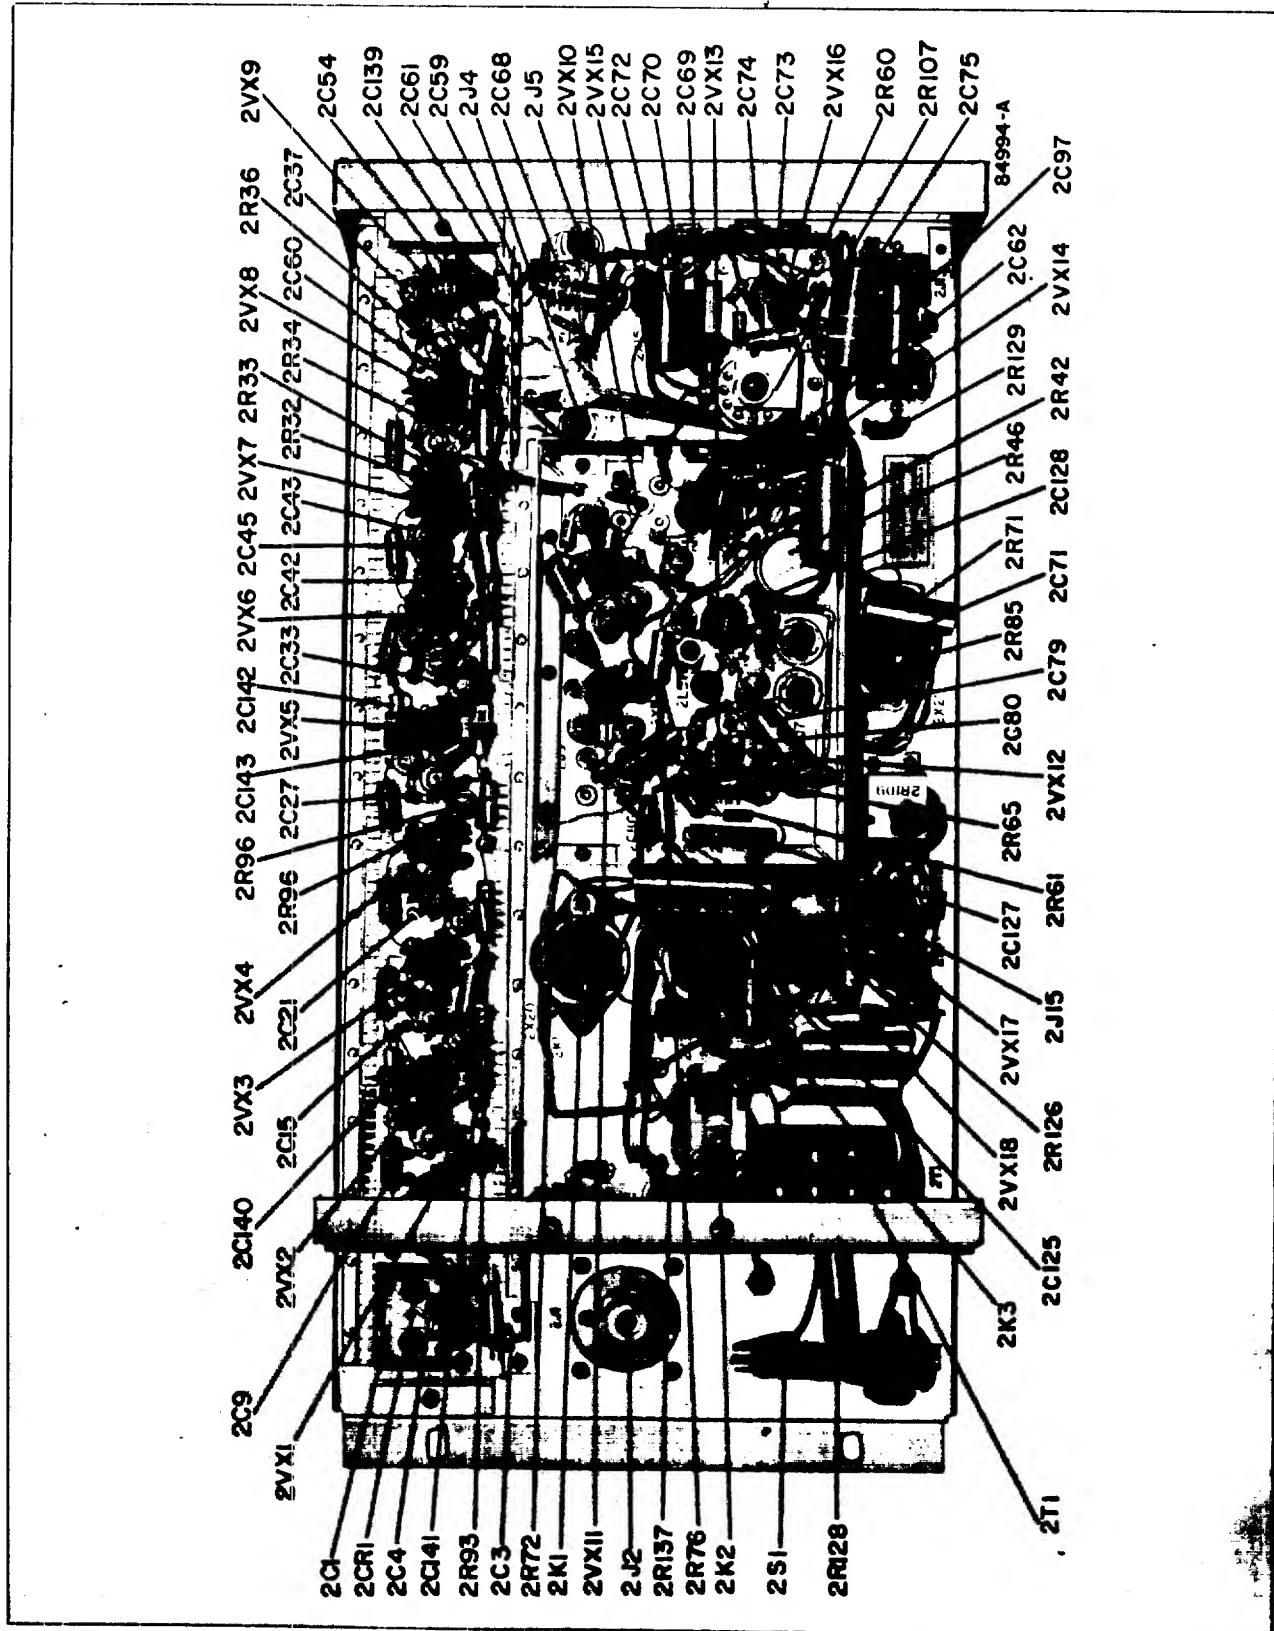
Receiver/Modulator--Rear View, Dust Cover and Shield Covers Removed
